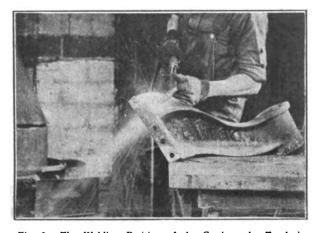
The Welding Position of the Casting; the Torch in Operation.
